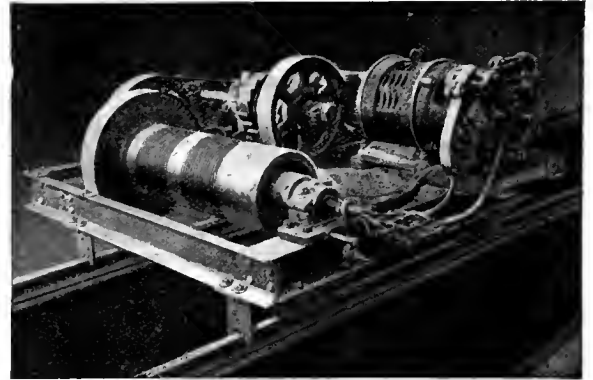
TYPE "A" BRAKE APPLIED TO CRANE MOTOR.
